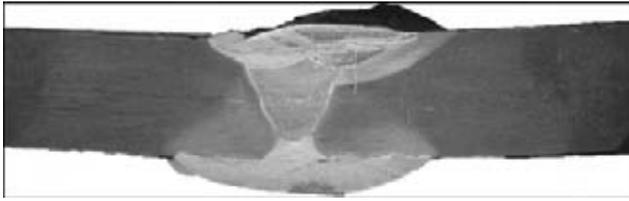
Macrostructure of 30KhGSA steel butt joint with austenitic Cr-Mn weld obtained using pilot consumables
